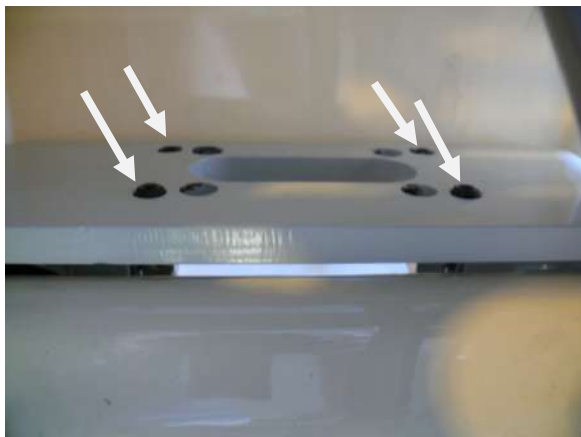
Notice the jacking setscrews. They will be used to level the bracket.
